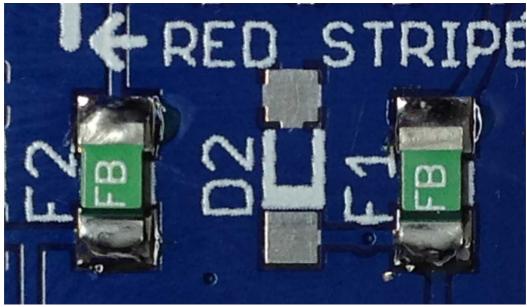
PTC fuses F1 & F2 installed on the PCB
